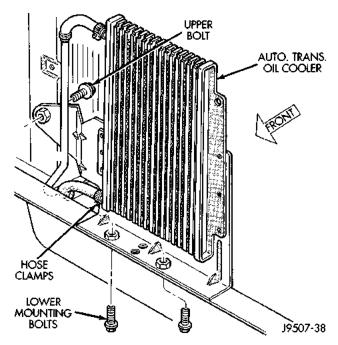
Auxiliary Air-To-Oil Cooler COOLANT RESERVE/OVERFLOW BOTTLE
